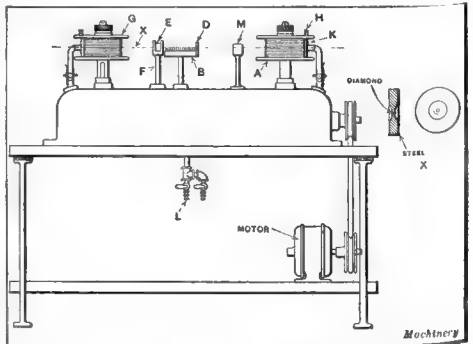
Machine used for drawing Tungsten Wire through Diamond Dies
